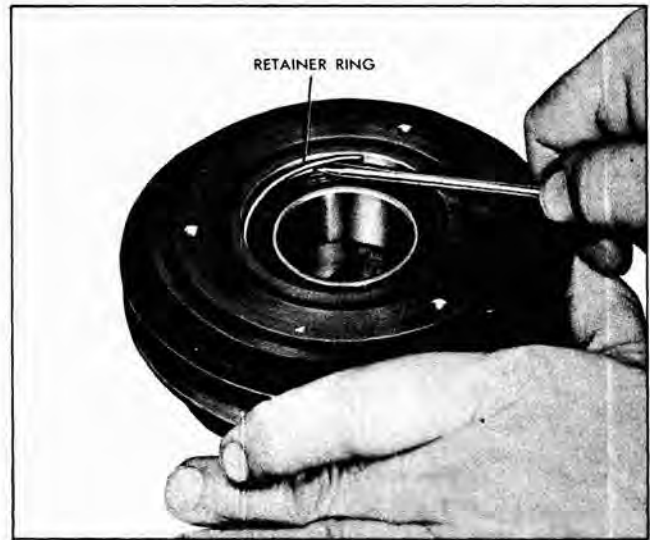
Removing Pulley Bearing Retainer Ring
